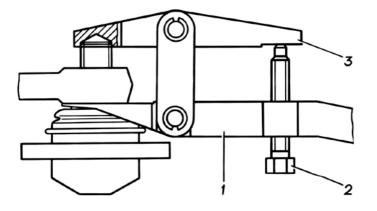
Suspension ball pin puller: 1 and 3 - arms; 2 - bolt
